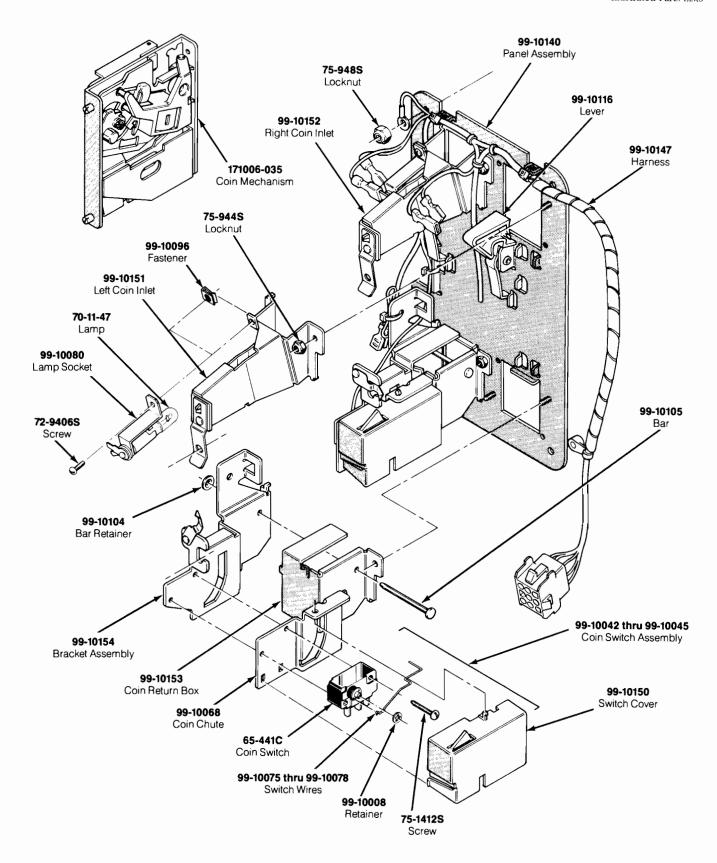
Coin Acceptors, Inc. Coin Door Assembly 171027-001 A
